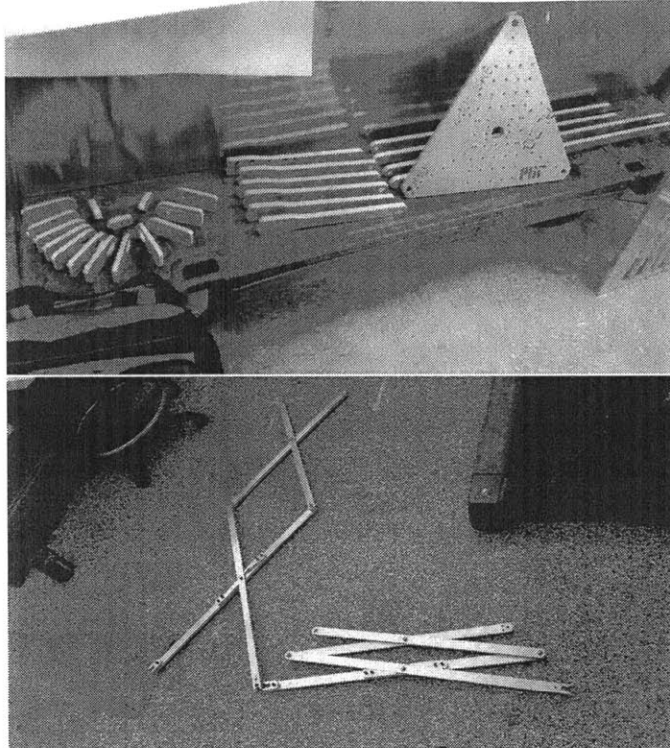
Set of scissor mechanism parts cut on the waterjet and partially assembled
